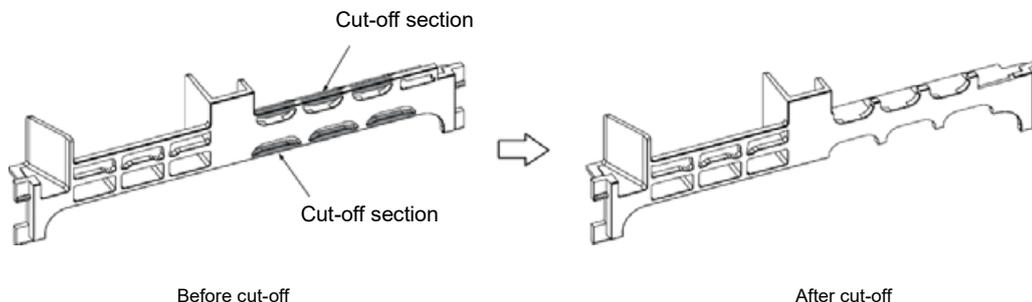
Wiring guide (for FRN0075G2S-2G)
